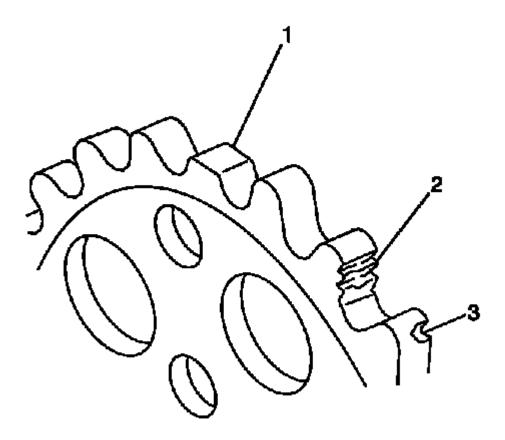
Identifying Damaged Sprocket Teeth Courtesy of GENERAL MOTORS CORP.
